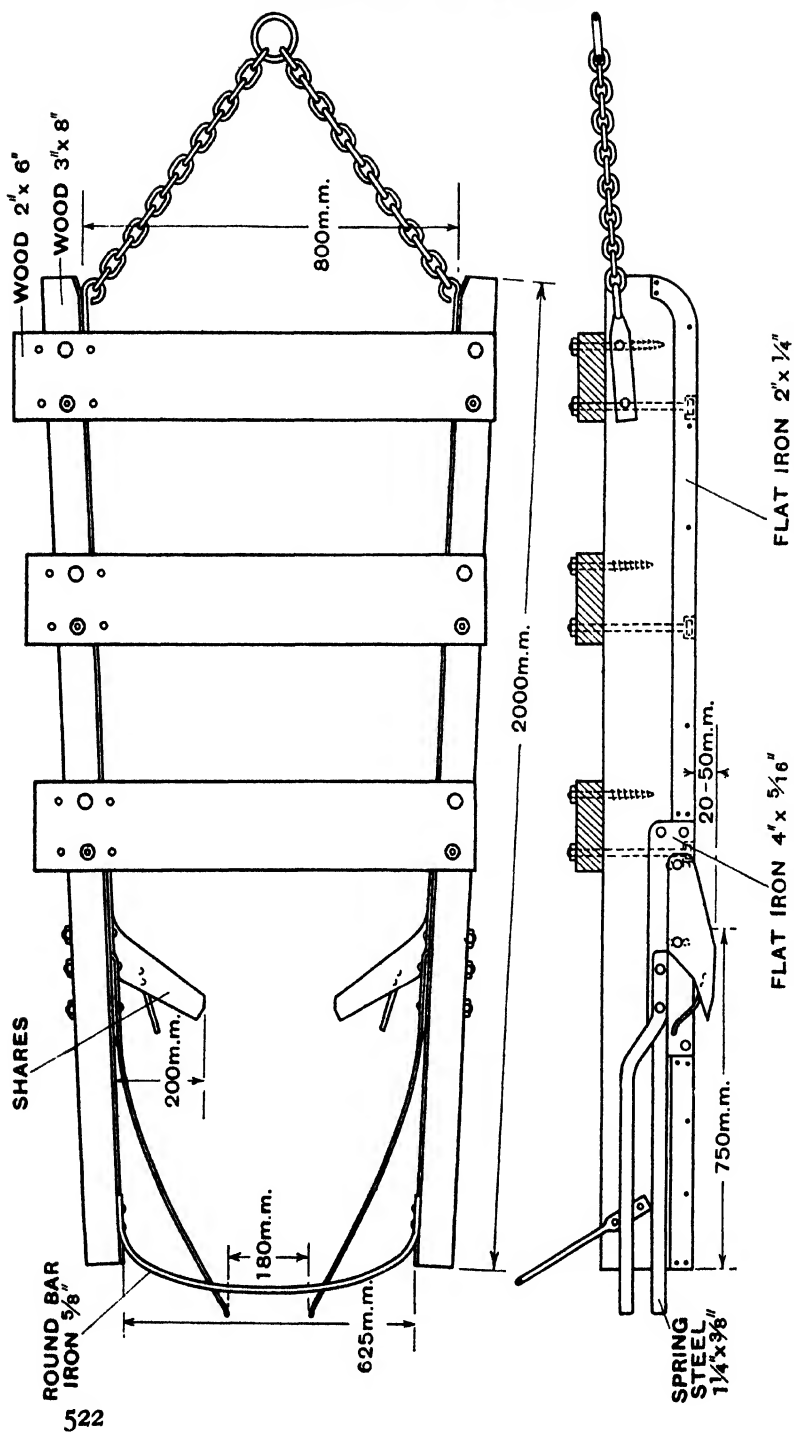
Plan and Section of Special Type of Root Sledge.
